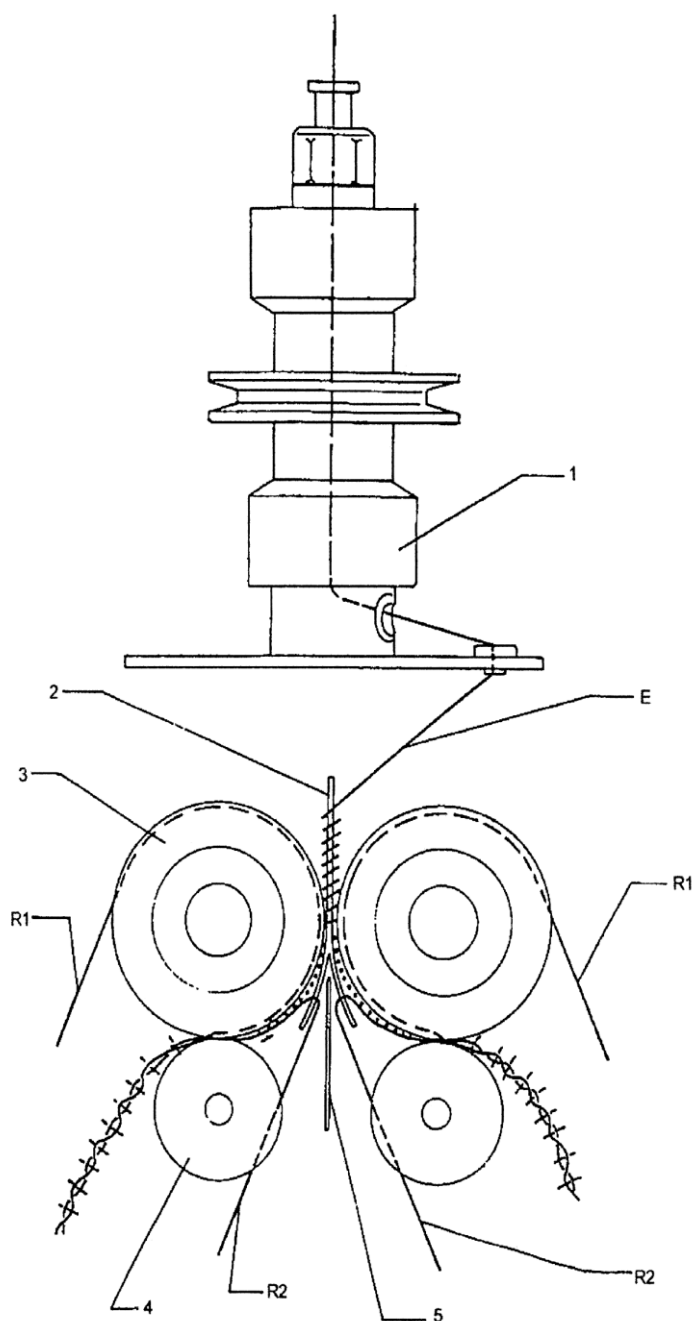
Spinning frame used for the production of chenille yarns: 1 – spinning head, E – multifilament thread, 2 – calibrator, 3, 4 – rollers feeding component threads, R1, R2 – component threads, 5 – cutter (source: Wojewódzka J., *Metody wytwarzania i cechy użytkowe przędzy fantazyjnej typu chenille* [Production Methods and Functional Properties of Chenille Fancy Yarn], Master's Thesis, Lodz University of Technology 1999, Supervisor: Grabowska K.E)
